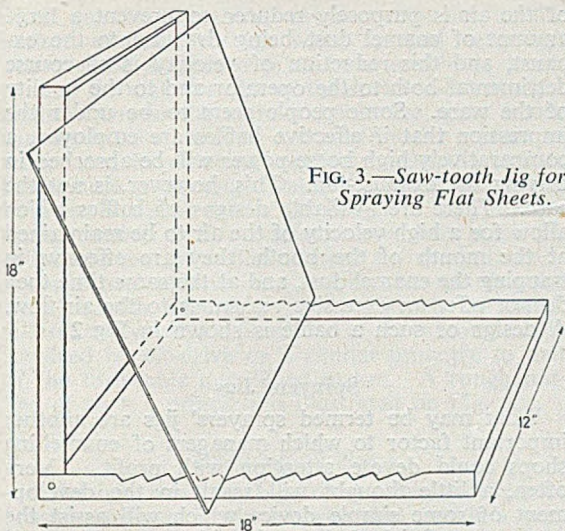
Saw-tooth Jig for Spraying Flat Sheets.
